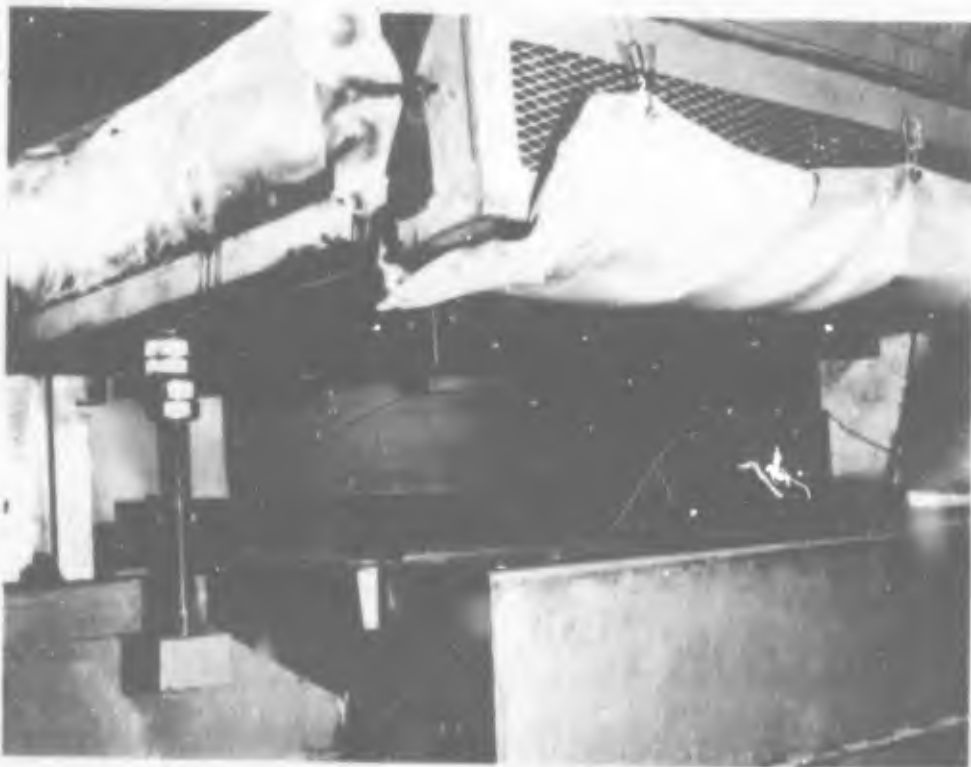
Upper Portion of Die is Brought Into Contact with Draw Ring
